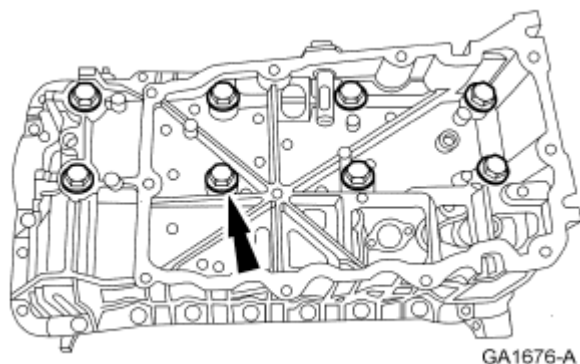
Locating Cylinder Block Cradle Inner Bolts
